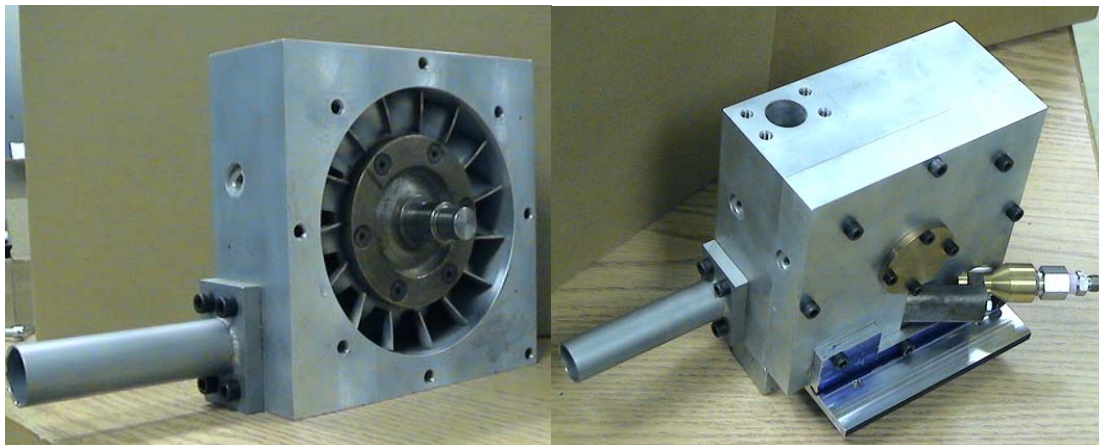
T-500 Steam Turbine. Image on the left shows the rotor installed in main part of housing. Image on the right shows fully assembled steam turbine.
